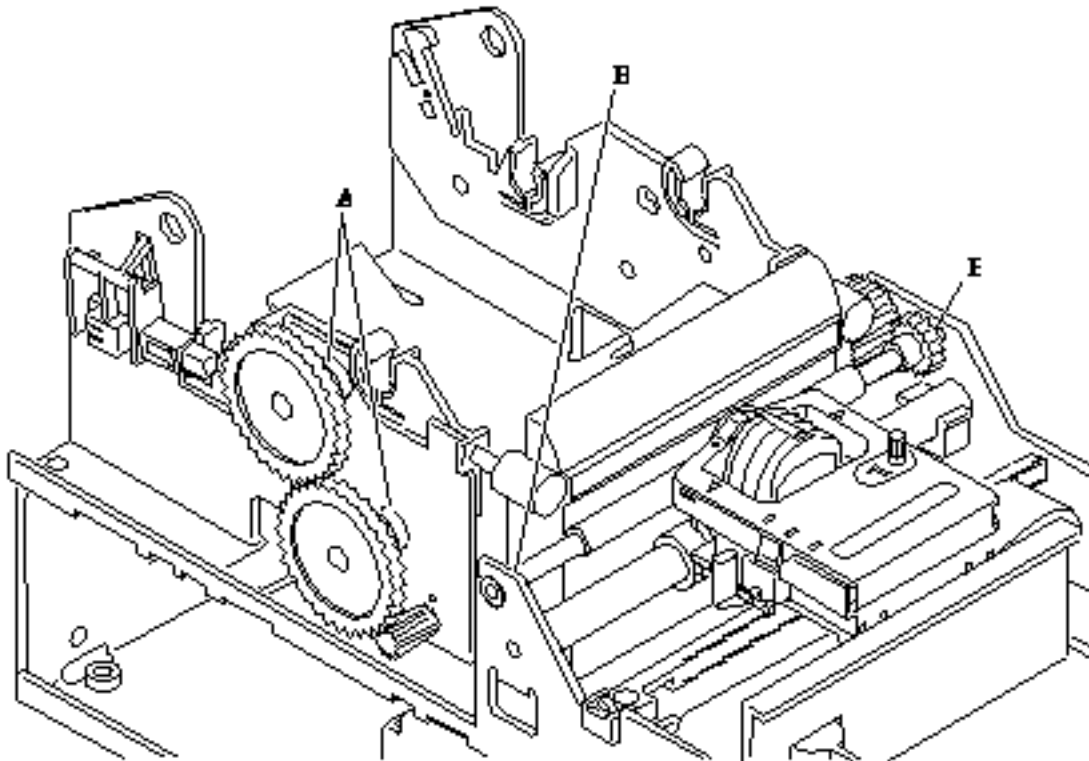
Lubricating the Journal Take-up Gears and Pressure Roll Bearing
